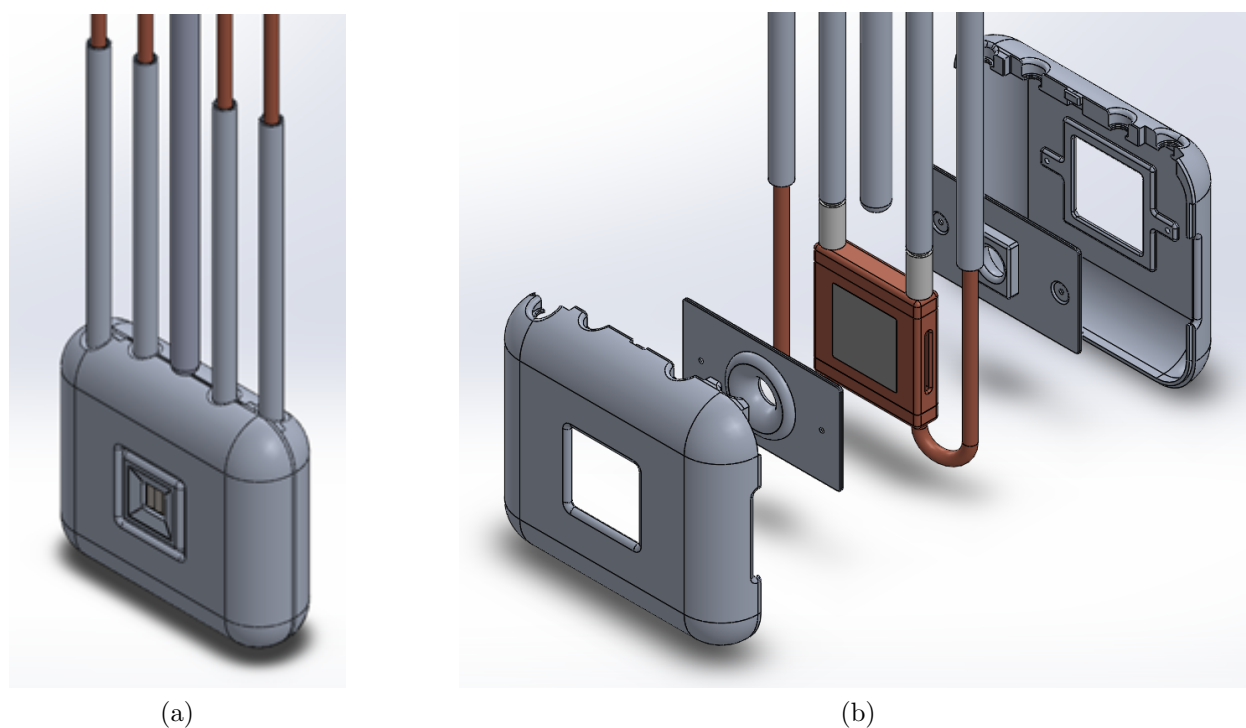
Electrostatic shroud: (a) assembled, (b) exploded view
